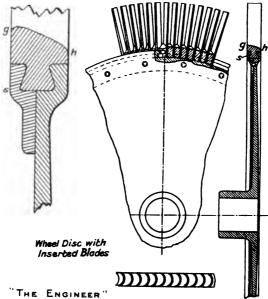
Revolving Wheel Disc with Blades inserted.
